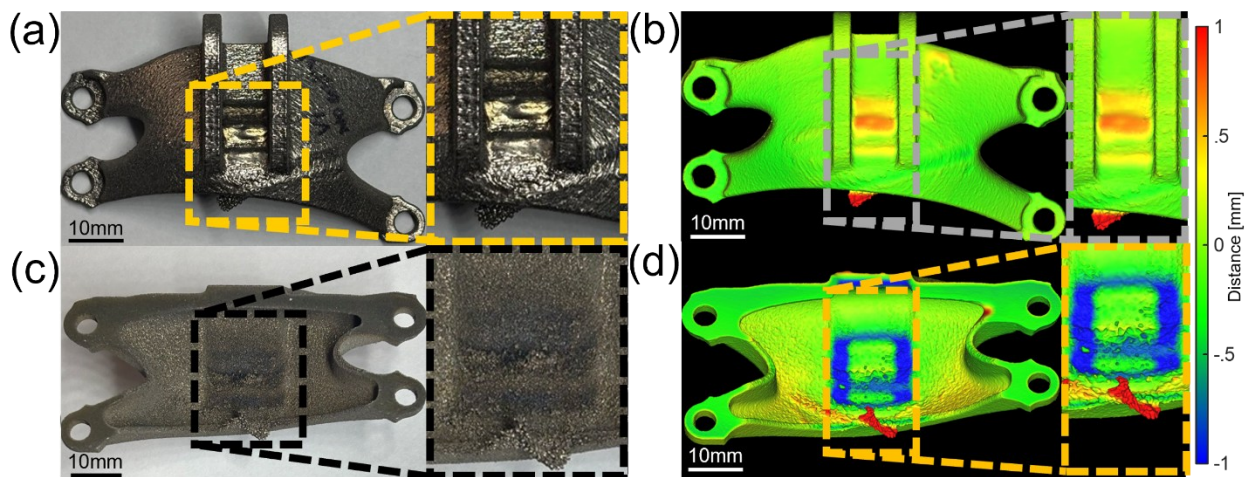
As printed and 3D-scanned unsupported uncontrolled bracket. (a) Top view of as-printed bracket. (b) Top view of 3D-scanned bracket. (c) Bottom-up view of as-printed bracket with as-machined support interface. (d) Bottom-up view of 3D-scanned bracket.
